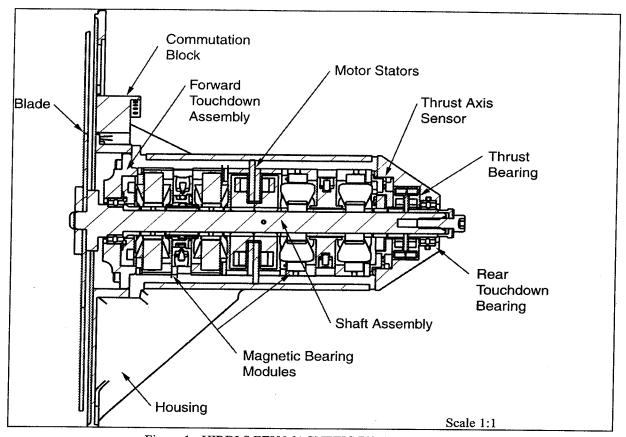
HIRDLS ETU MAGNETIC BEARING CHOPPER
